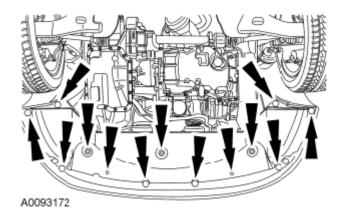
Identifying Retainers And Engine Under Shield Courtesy of FORD MOTOR CO.
